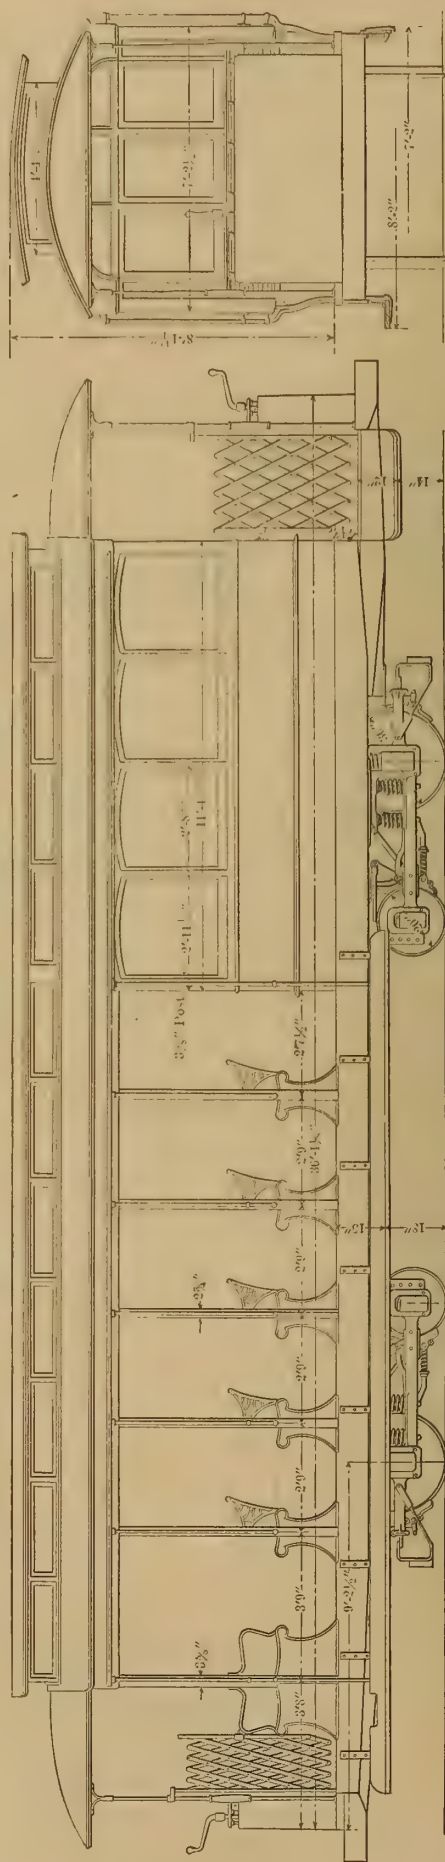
PLAN AND ELEVATIONS OF BRILL'S CONVERTIBLE CAR, SHOWING HALF THE SIDE PANELS RAISED. J. G. BRILL CO.
